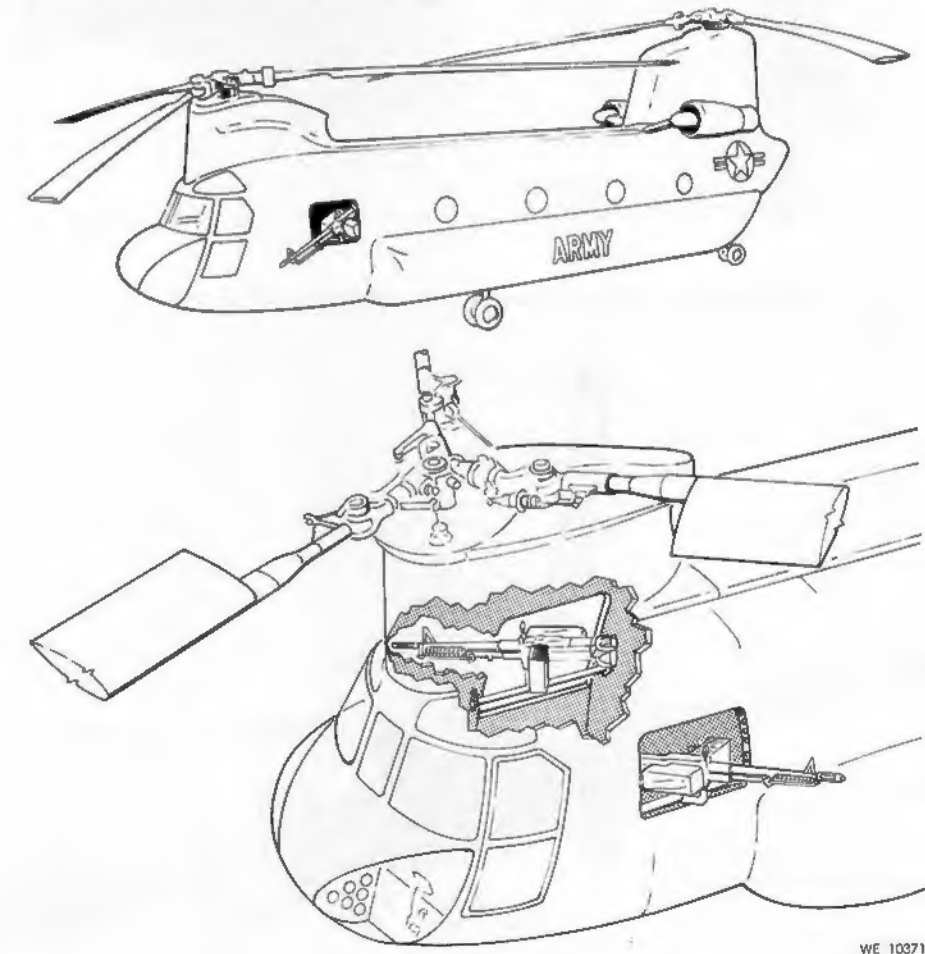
7.62-millimeter machine gun helicopter armament subsystem XM24—installed on CH-47A helicopter.
